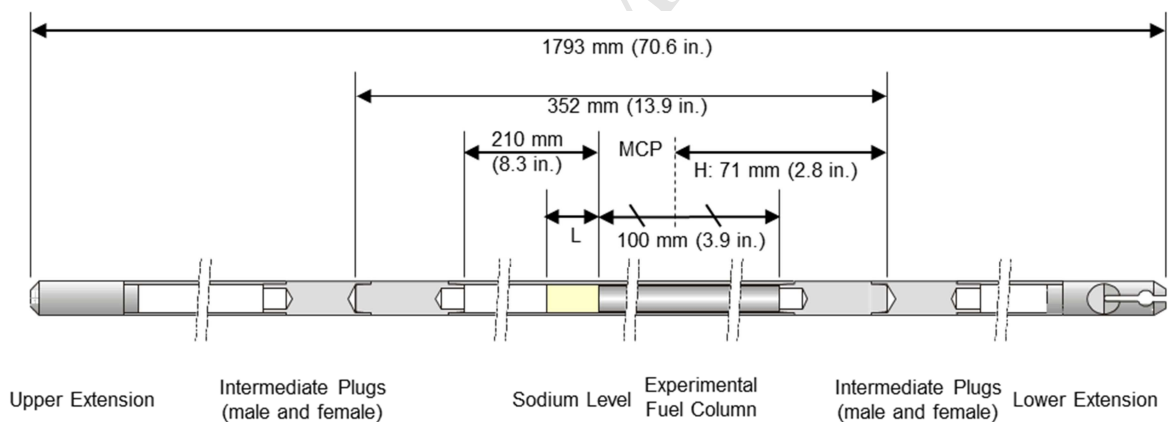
FUTURIX-FTA pin configuration and general dimensions
